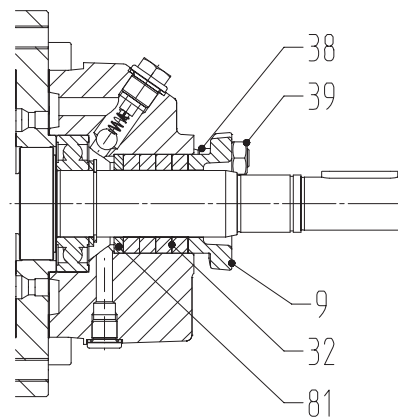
SN..ER..U2, internal bearing, stuffing box packing
